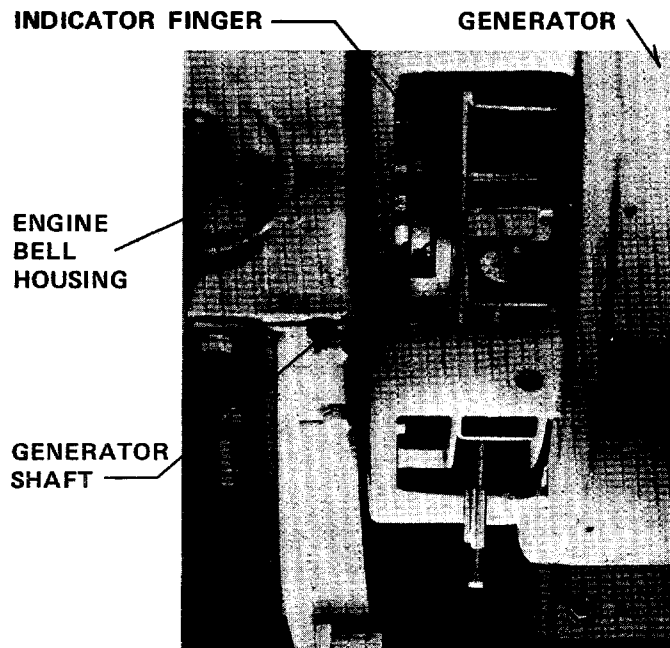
CHECKING GENERATOR SHAFT RUNOUT
